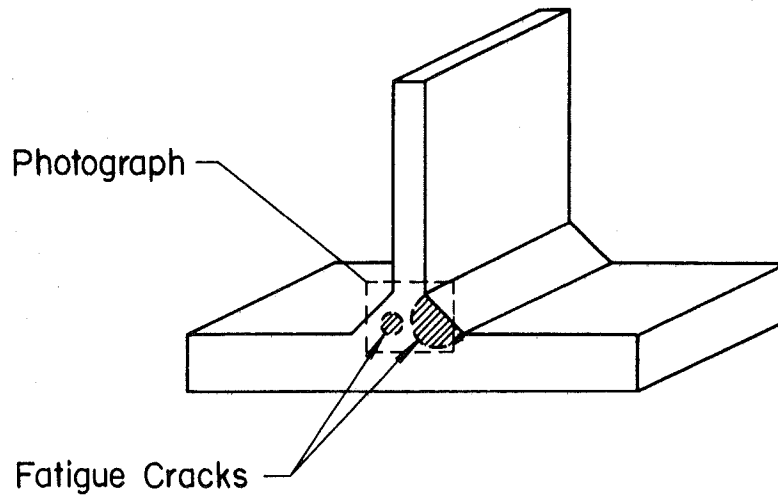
Two small fatigue cracks that initiated from pores in the longitudinal fillet-weld and grew perpendicular to the axis of the weld ( $\sim 8.5$ )
